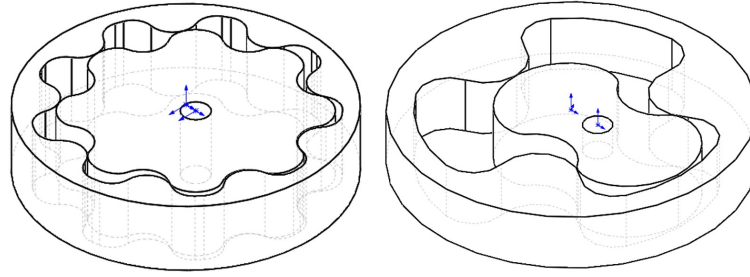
(a) A gerotor core with 8-tooth inner gear and 9-tooth outer gear; (b) a gerotor core with 2-tooth inner gear and 3-tooth outer gear.
